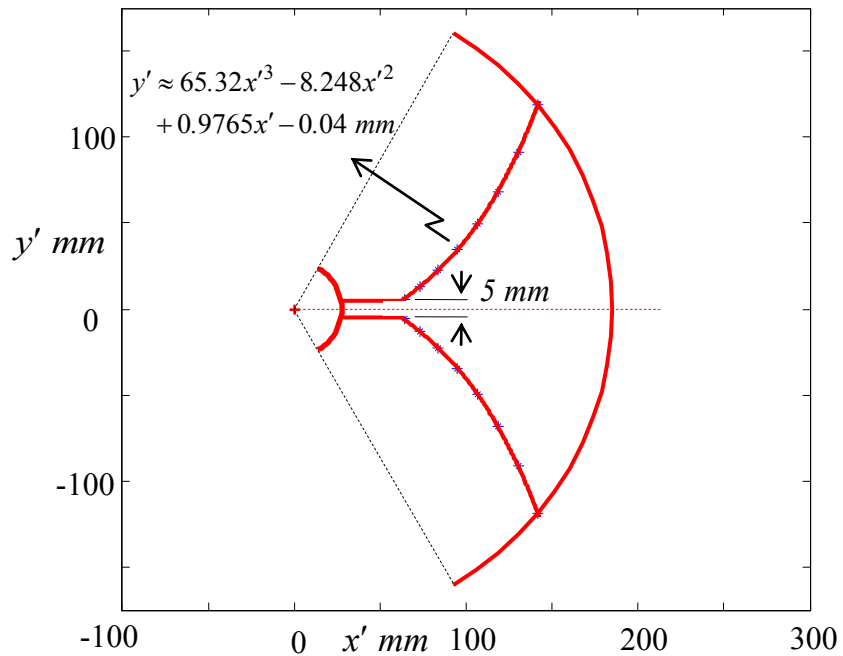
120° partial simplified top view of the agitator shown in Fig. 5.5-1, with most of the small details and holes neglected. All dimensions are in millimeters. See Fig. 5.5-3 for any missing dimensions. The blue crosses denote the actual position of the surface edges that are approximated by a polynomial fit.
